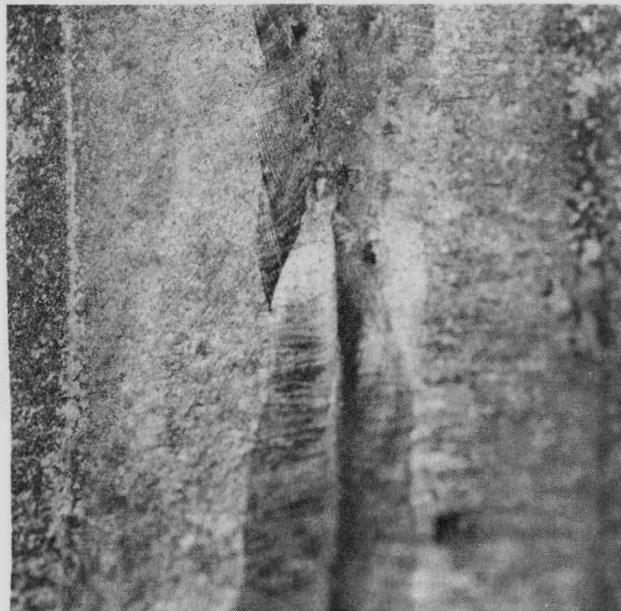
The internal surface of the weld overlap region of capsule SRP-127 had surface defects, but no cracks were visible (12X).
